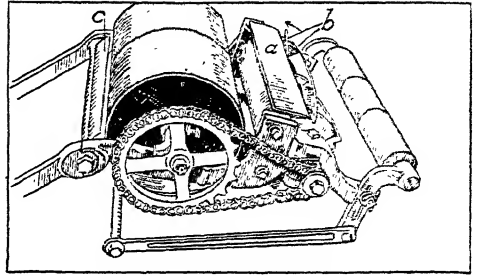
Under Side of Lawn Mower showing Cutting edges
